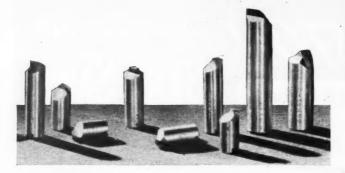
Carbidetipped tools, diamondlapped on a Heald
